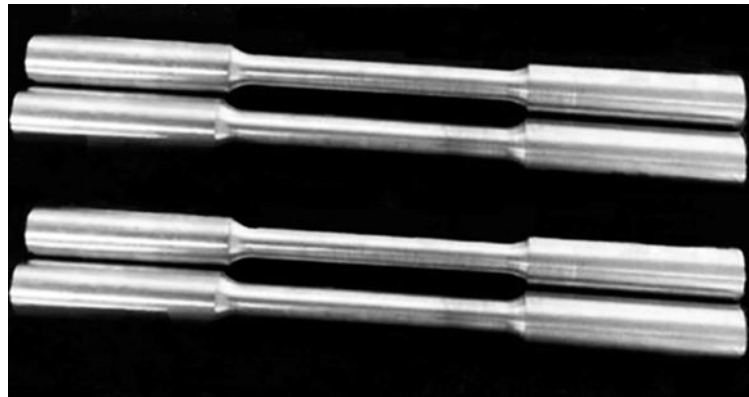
Ground and polished machined specimens; ready for tensile tests.
